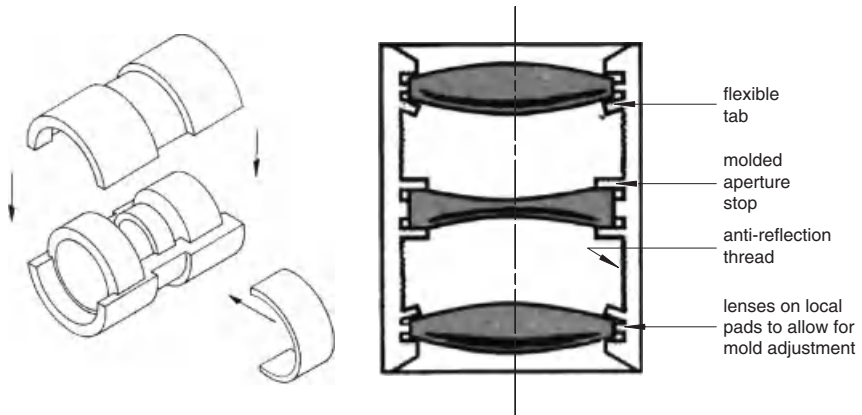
Clamshell lens housing. Left: the device consists of two identical housing half-shells, between which the lenses are inserted. The whole assembly is clamped by an expansion C-ring, which is snapped in the slot [2]. Right: internal mounting details [9] such as flexible tabs, integrated aperture stops, antireflection threads, and load pads to allow for mold adjustment [3].
